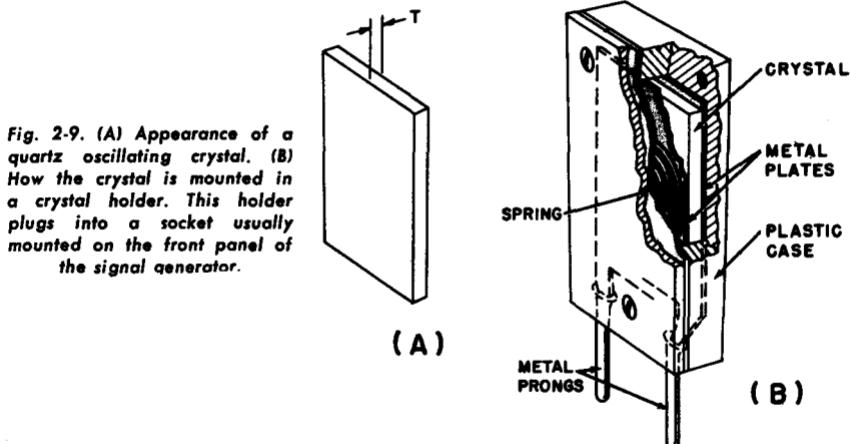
(A) Appearance of a quartz oscillating crystal. (B) How the crystal is mounted in a crystal holder. This holder plugs into a socket usually mounted on the front panel of the signal generator.
